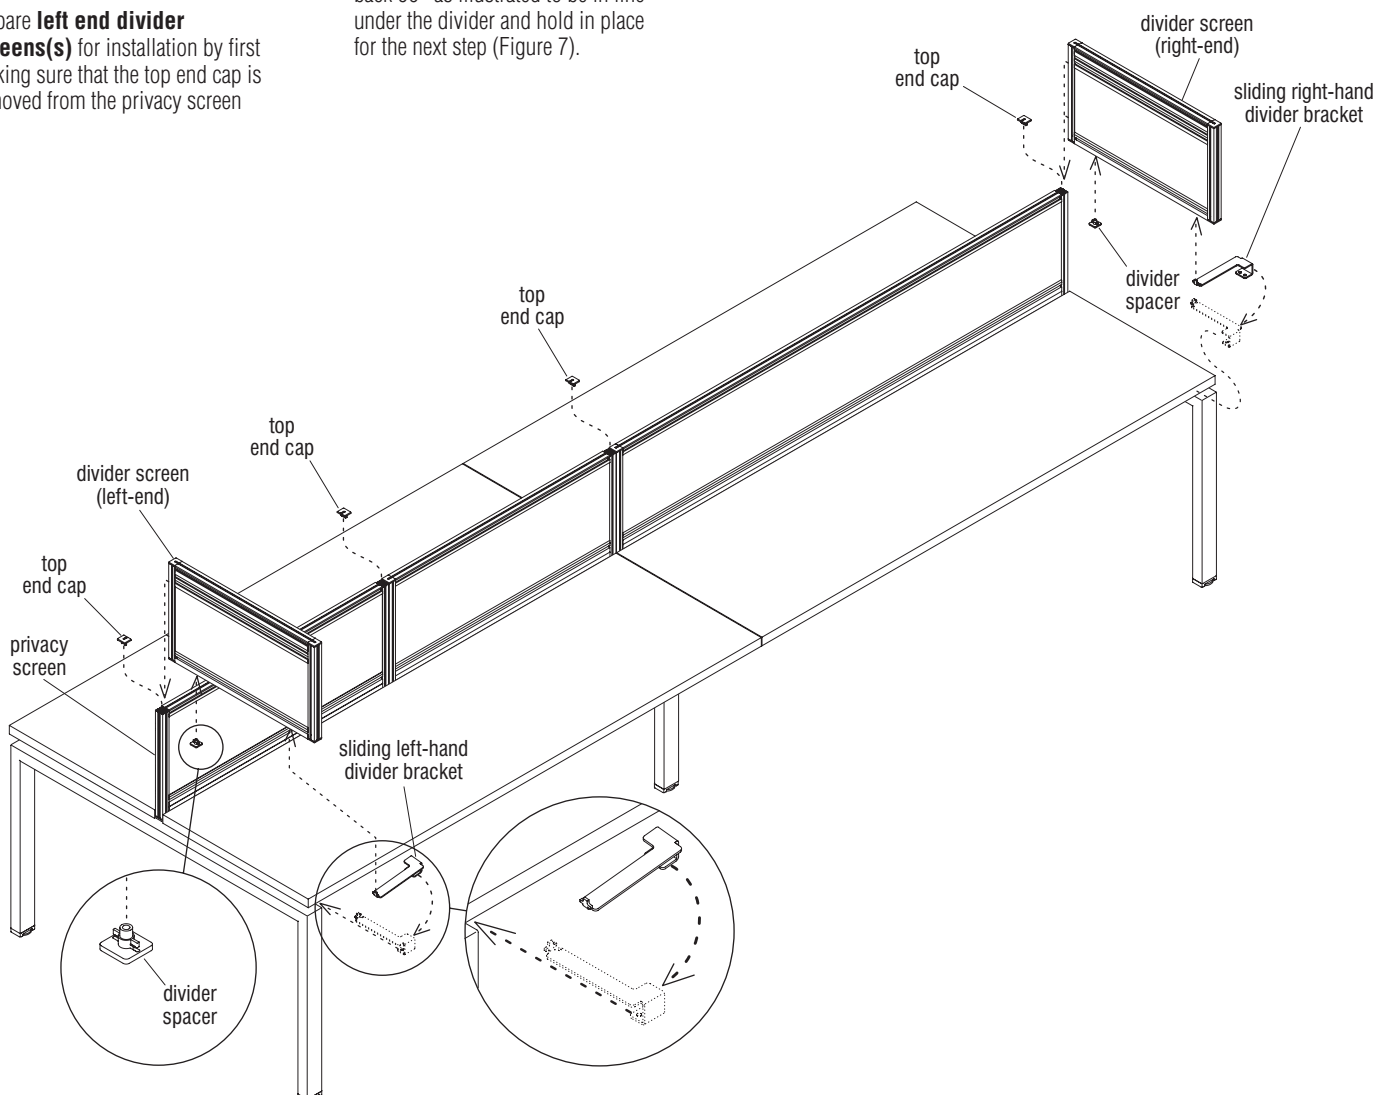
Dual-Sided Benching with Sliding Worksurfaces - End Divider Screen Installation
